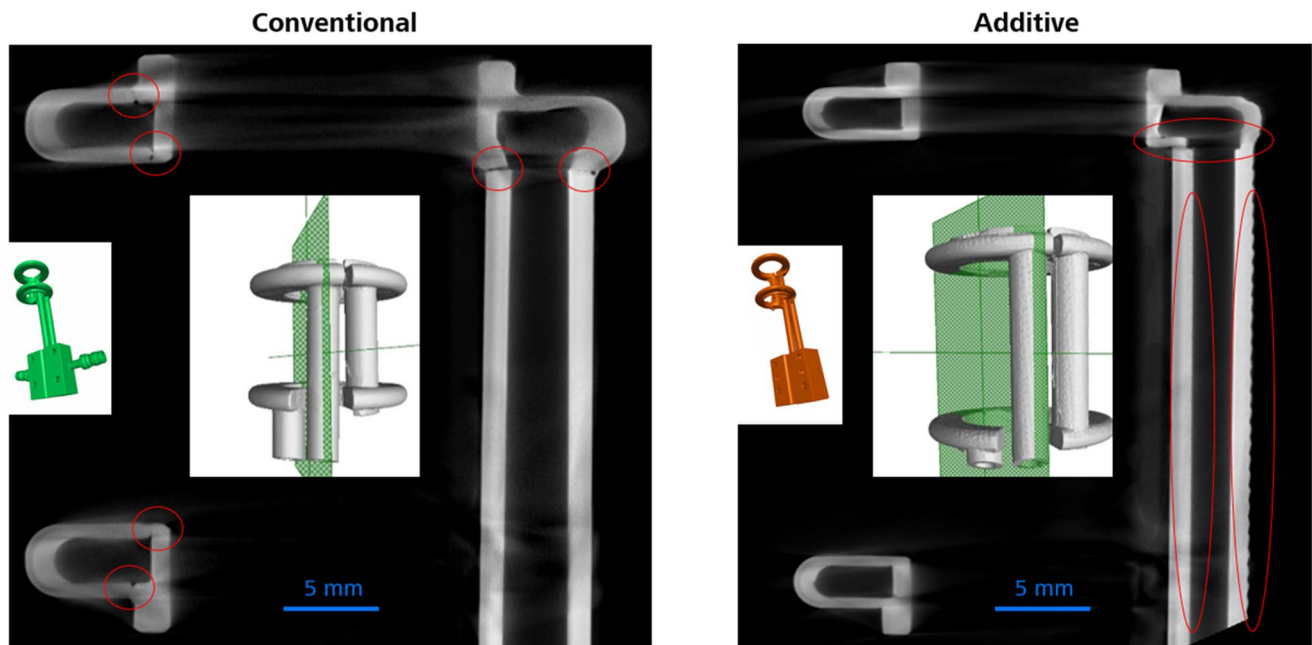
XCT inspection of induction hardening coils: (left) conventionally produced and (right) additively manufactured
